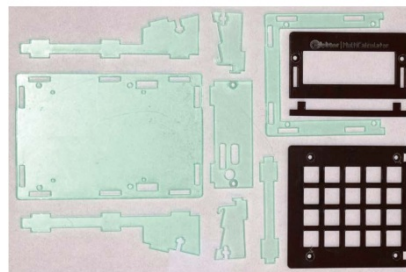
All the panels that make up the enclosure. A protective foil is still covering the panels.
